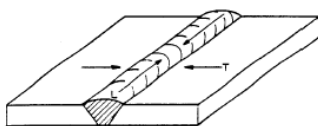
Longitudinal (L) and transverse (T) shrinkage stresses in a butt weld.
